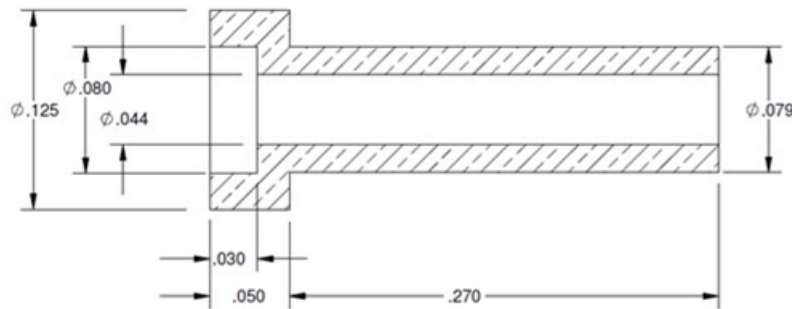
Cable stop design details. Cable stop mounting surface shown to the left with counterbore to prevent contact with the cable; crimping area shown to the right. Assembly has the cable passing through the stop, epoxy filling the free space and the counter bore, and two crimps placed into the thin section with a small gap between the crimp location to provide a keyway fit of the epoxy inside the stop.
